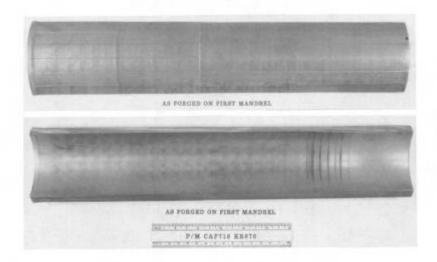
View of outside diameter and inside diameter of P/M 718 tube forged on first mandrel incrementally to provide 9 pct, 14 pct and 22 pct reduction in cross section. Note longitudinal ribs produced by segmented dies which will be removed by machining the outside surface. The interior surface is very smooth but bears an impression of mandrel and segmented die ring.
